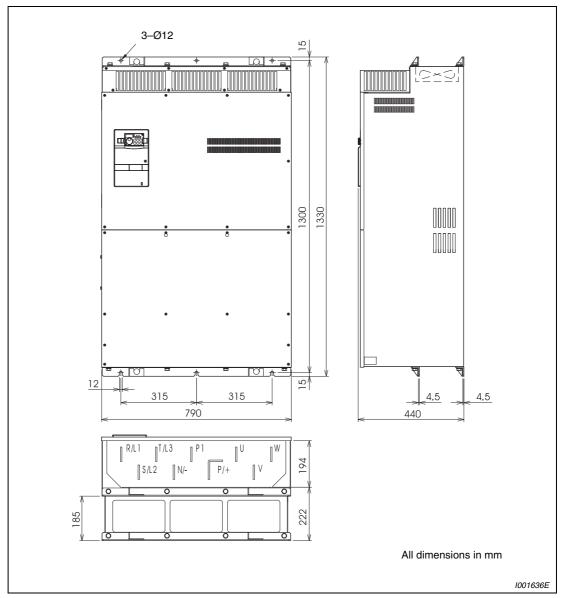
Dimensions of FR-A740-07700 and FR-A740-08660
